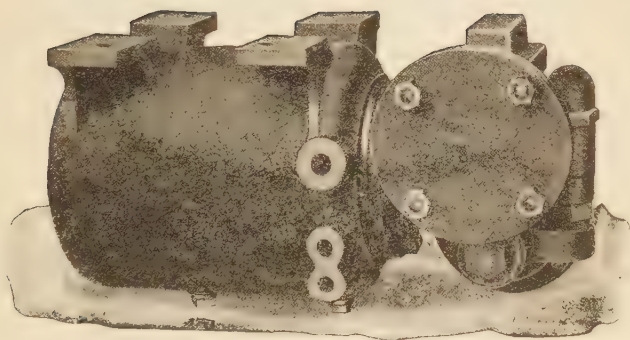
NO. 5 DISTRIBUTING VALVE AND DOUBLE-CHAMBER
